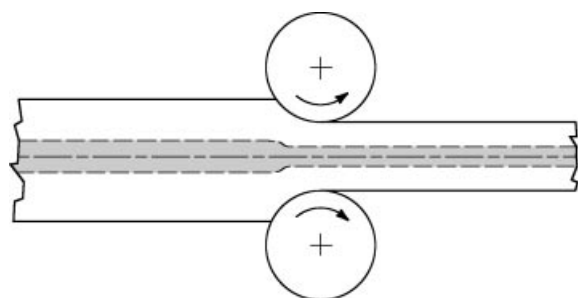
Roll bonding process of making a laminated MMC; a metallurgical bond is produced.
